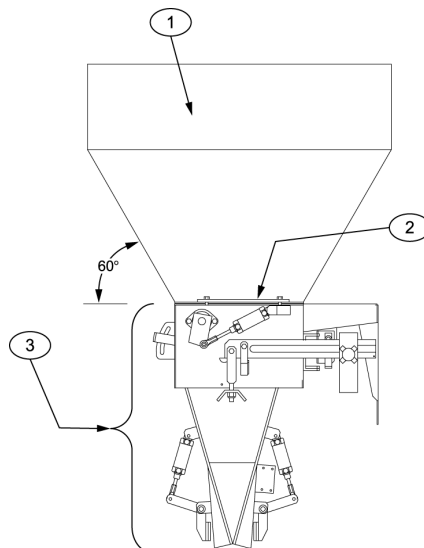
Hanging the Cabinet Assembly on the Hopper Flange
